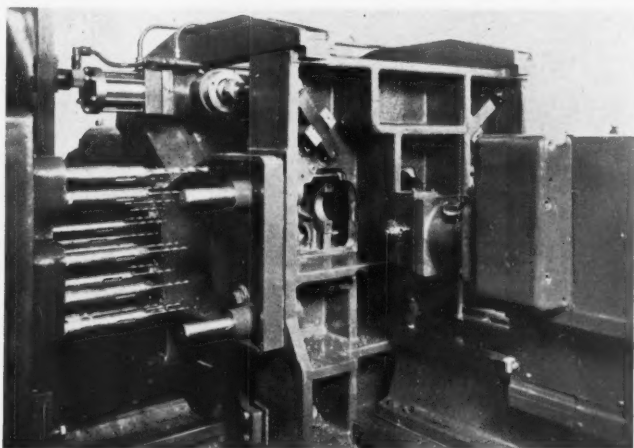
Three-way machine with Baush driving units and Archdale heads. Five milling attachments are fitted to one head
